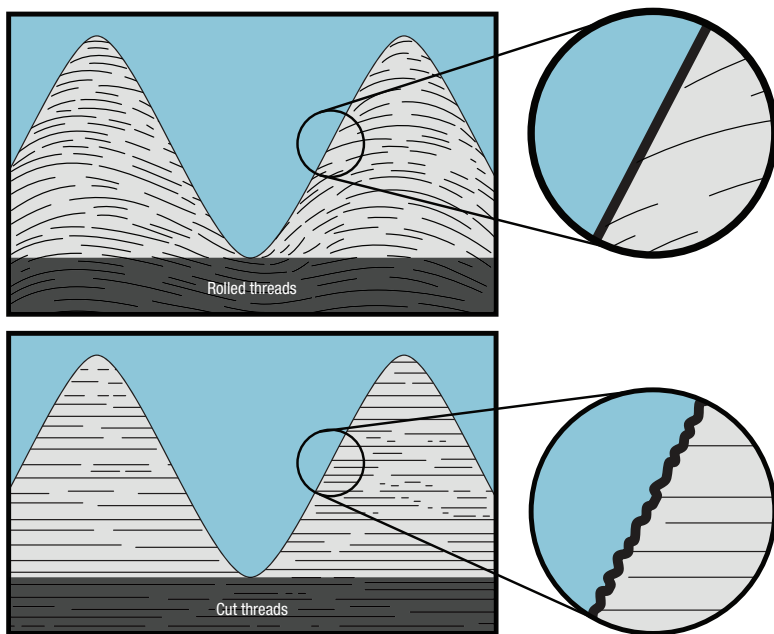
Thread cutting and thread rolling are the two most commonly used methods for the machining of threaded parts
